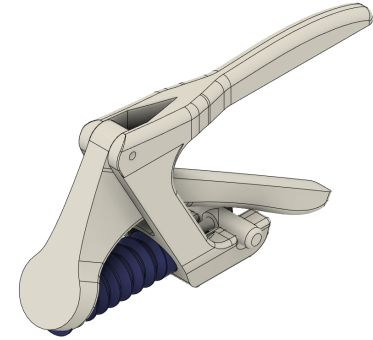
Isometric view of the CAD model of the frame and handle of prototype B.
